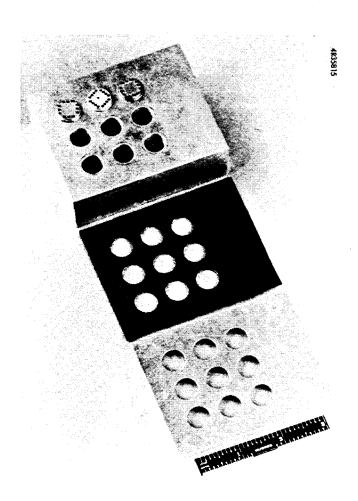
TO type masking tooling, disassembled with typical parts in place.
